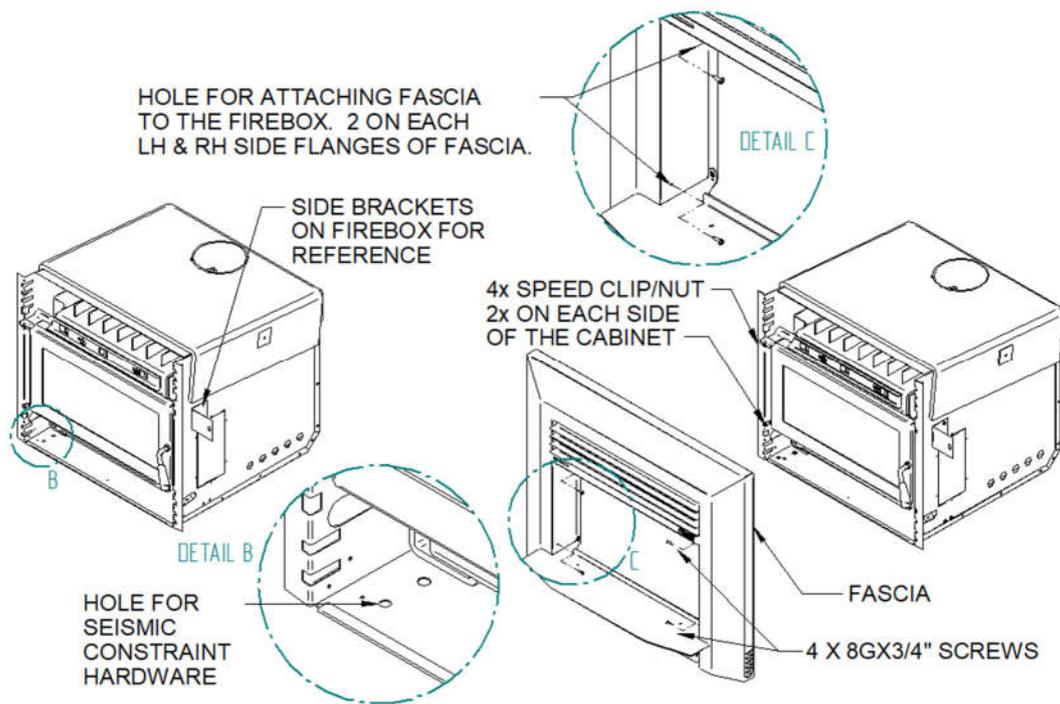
Seismic Holes, Side Brackets & Fascia Mounting holes
